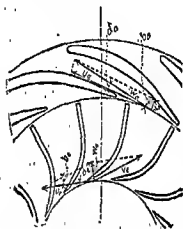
Velocity Diagram of Radial-bladed Impeller with Bladed Diffuser.
